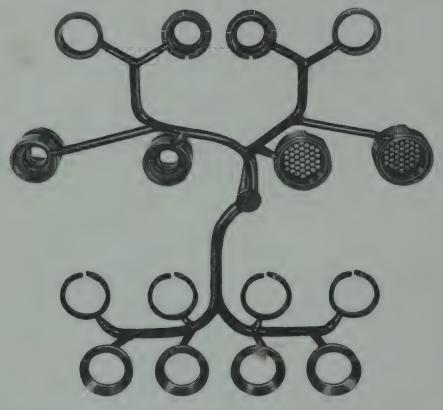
Injection molded piece consisting of parts for a fire extinguisher pump. Note the relationship of runners and molded parts. The complexity of design is illustrated by the strainers and threaded parts. (Courtesy of Santay Corporation.)
